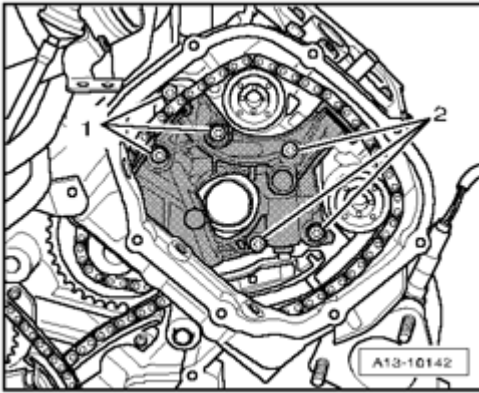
Removing Bolts, Right Chain Tensioner And Right Camshaft Timing Chain
